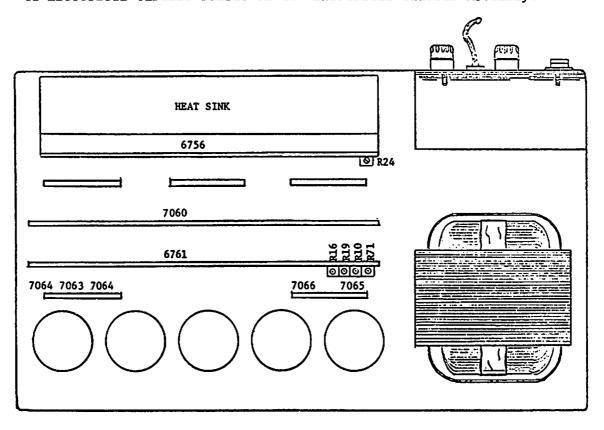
ELECTRICAL CHASSIS ASSEMBLY LAYOUT
